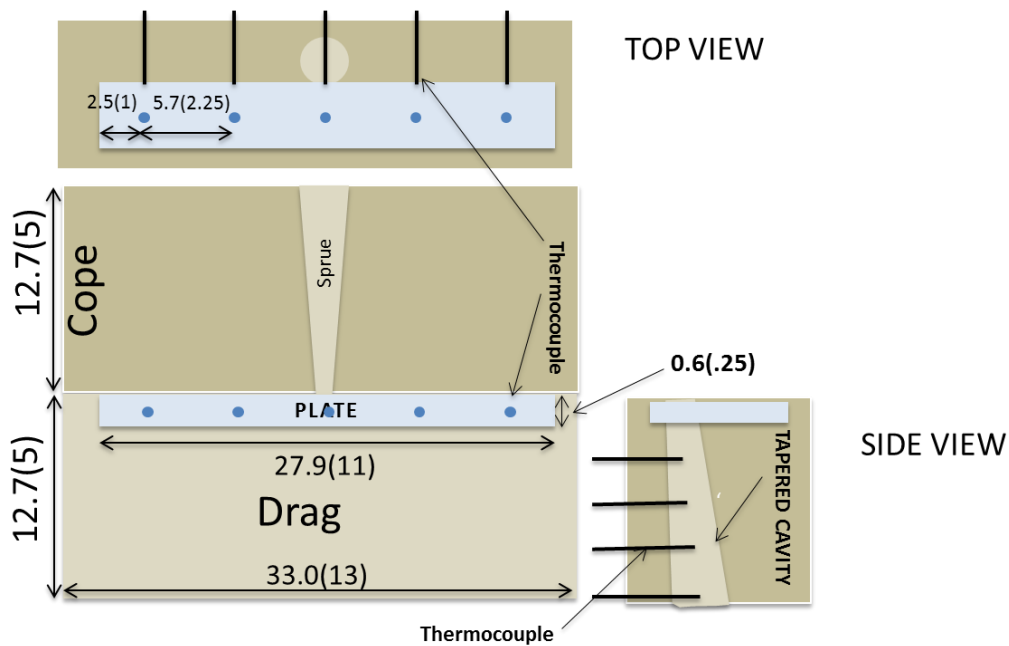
Schematic of mold showing K-type thermocouples inserted from side into the casting (all dimensions in cm with numbers in brackets showing dimensions in inches)
